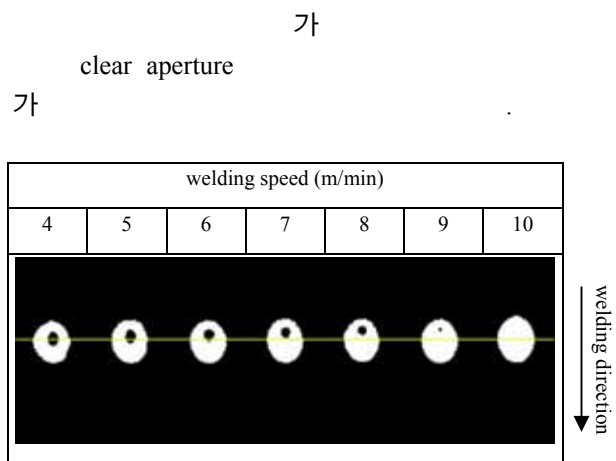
Behavior of clear aperture according to welding speed (laser power: 3kW)
